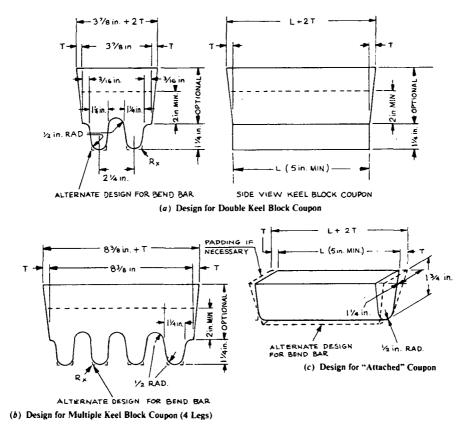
B Test Coupons for Castings (in.) (see Table 1 for Details of Design)
